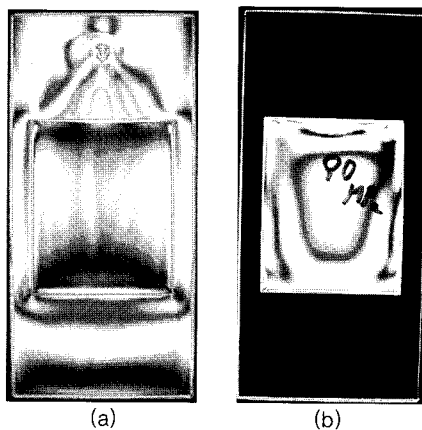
Birefringence pattern of over-molded product: (a) injection molding of the first resin; (b) the final product after injection molding of the second resin.
